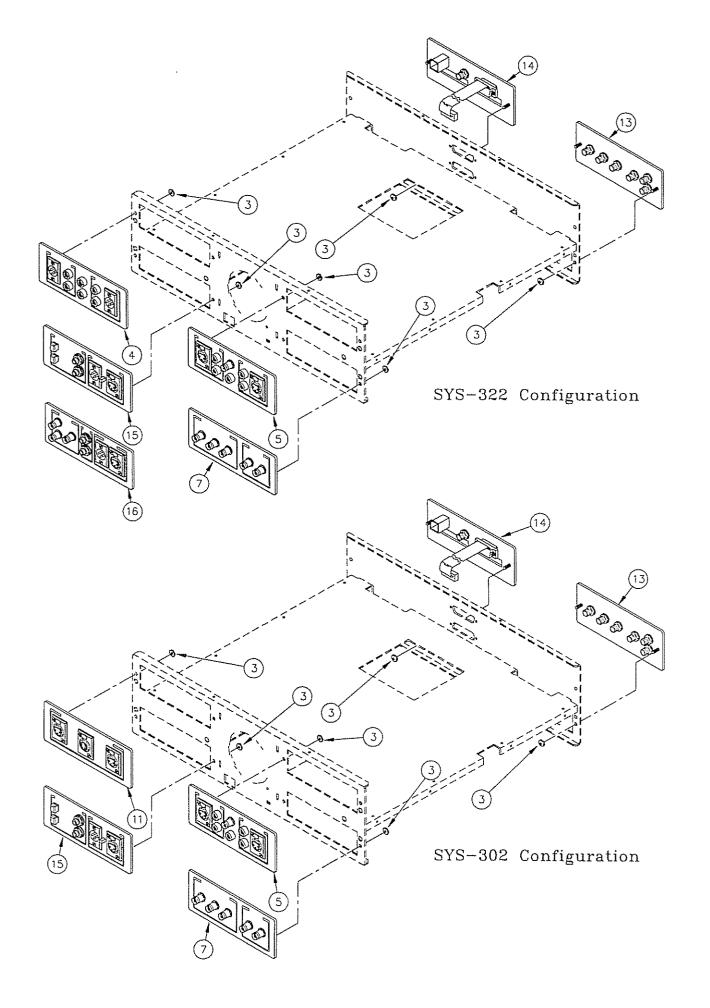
FRONT AND REAR PANEL ASSEMBLY
